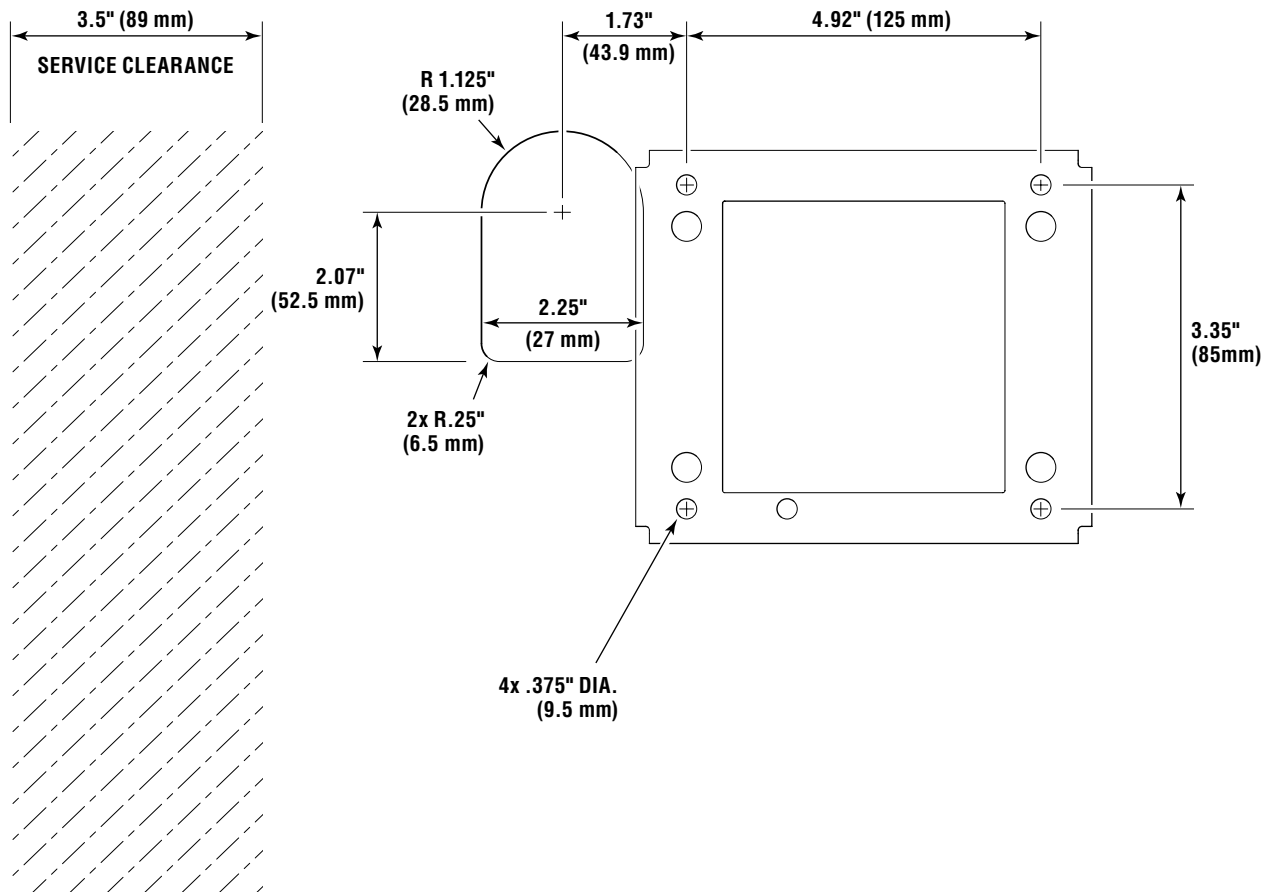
X30 Mounting Plate Dimensions & Exhaust Hole.
